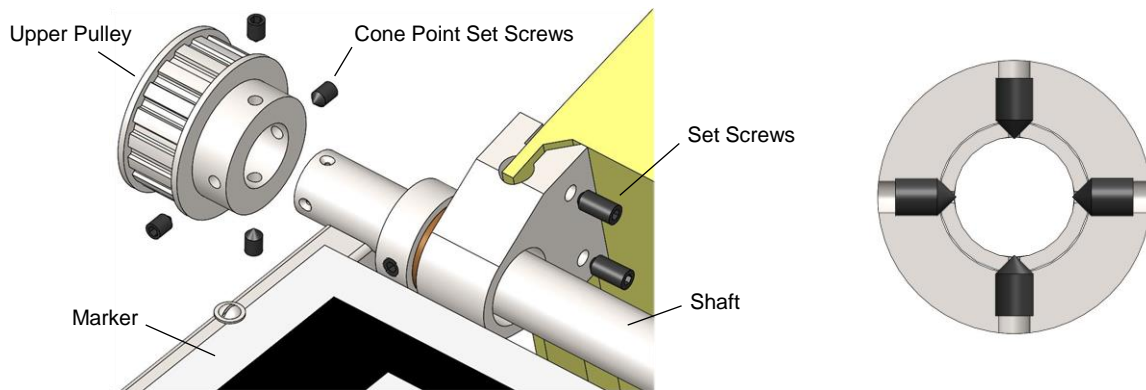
Alignment and attachment of upper pulley and rotary marker shaft
